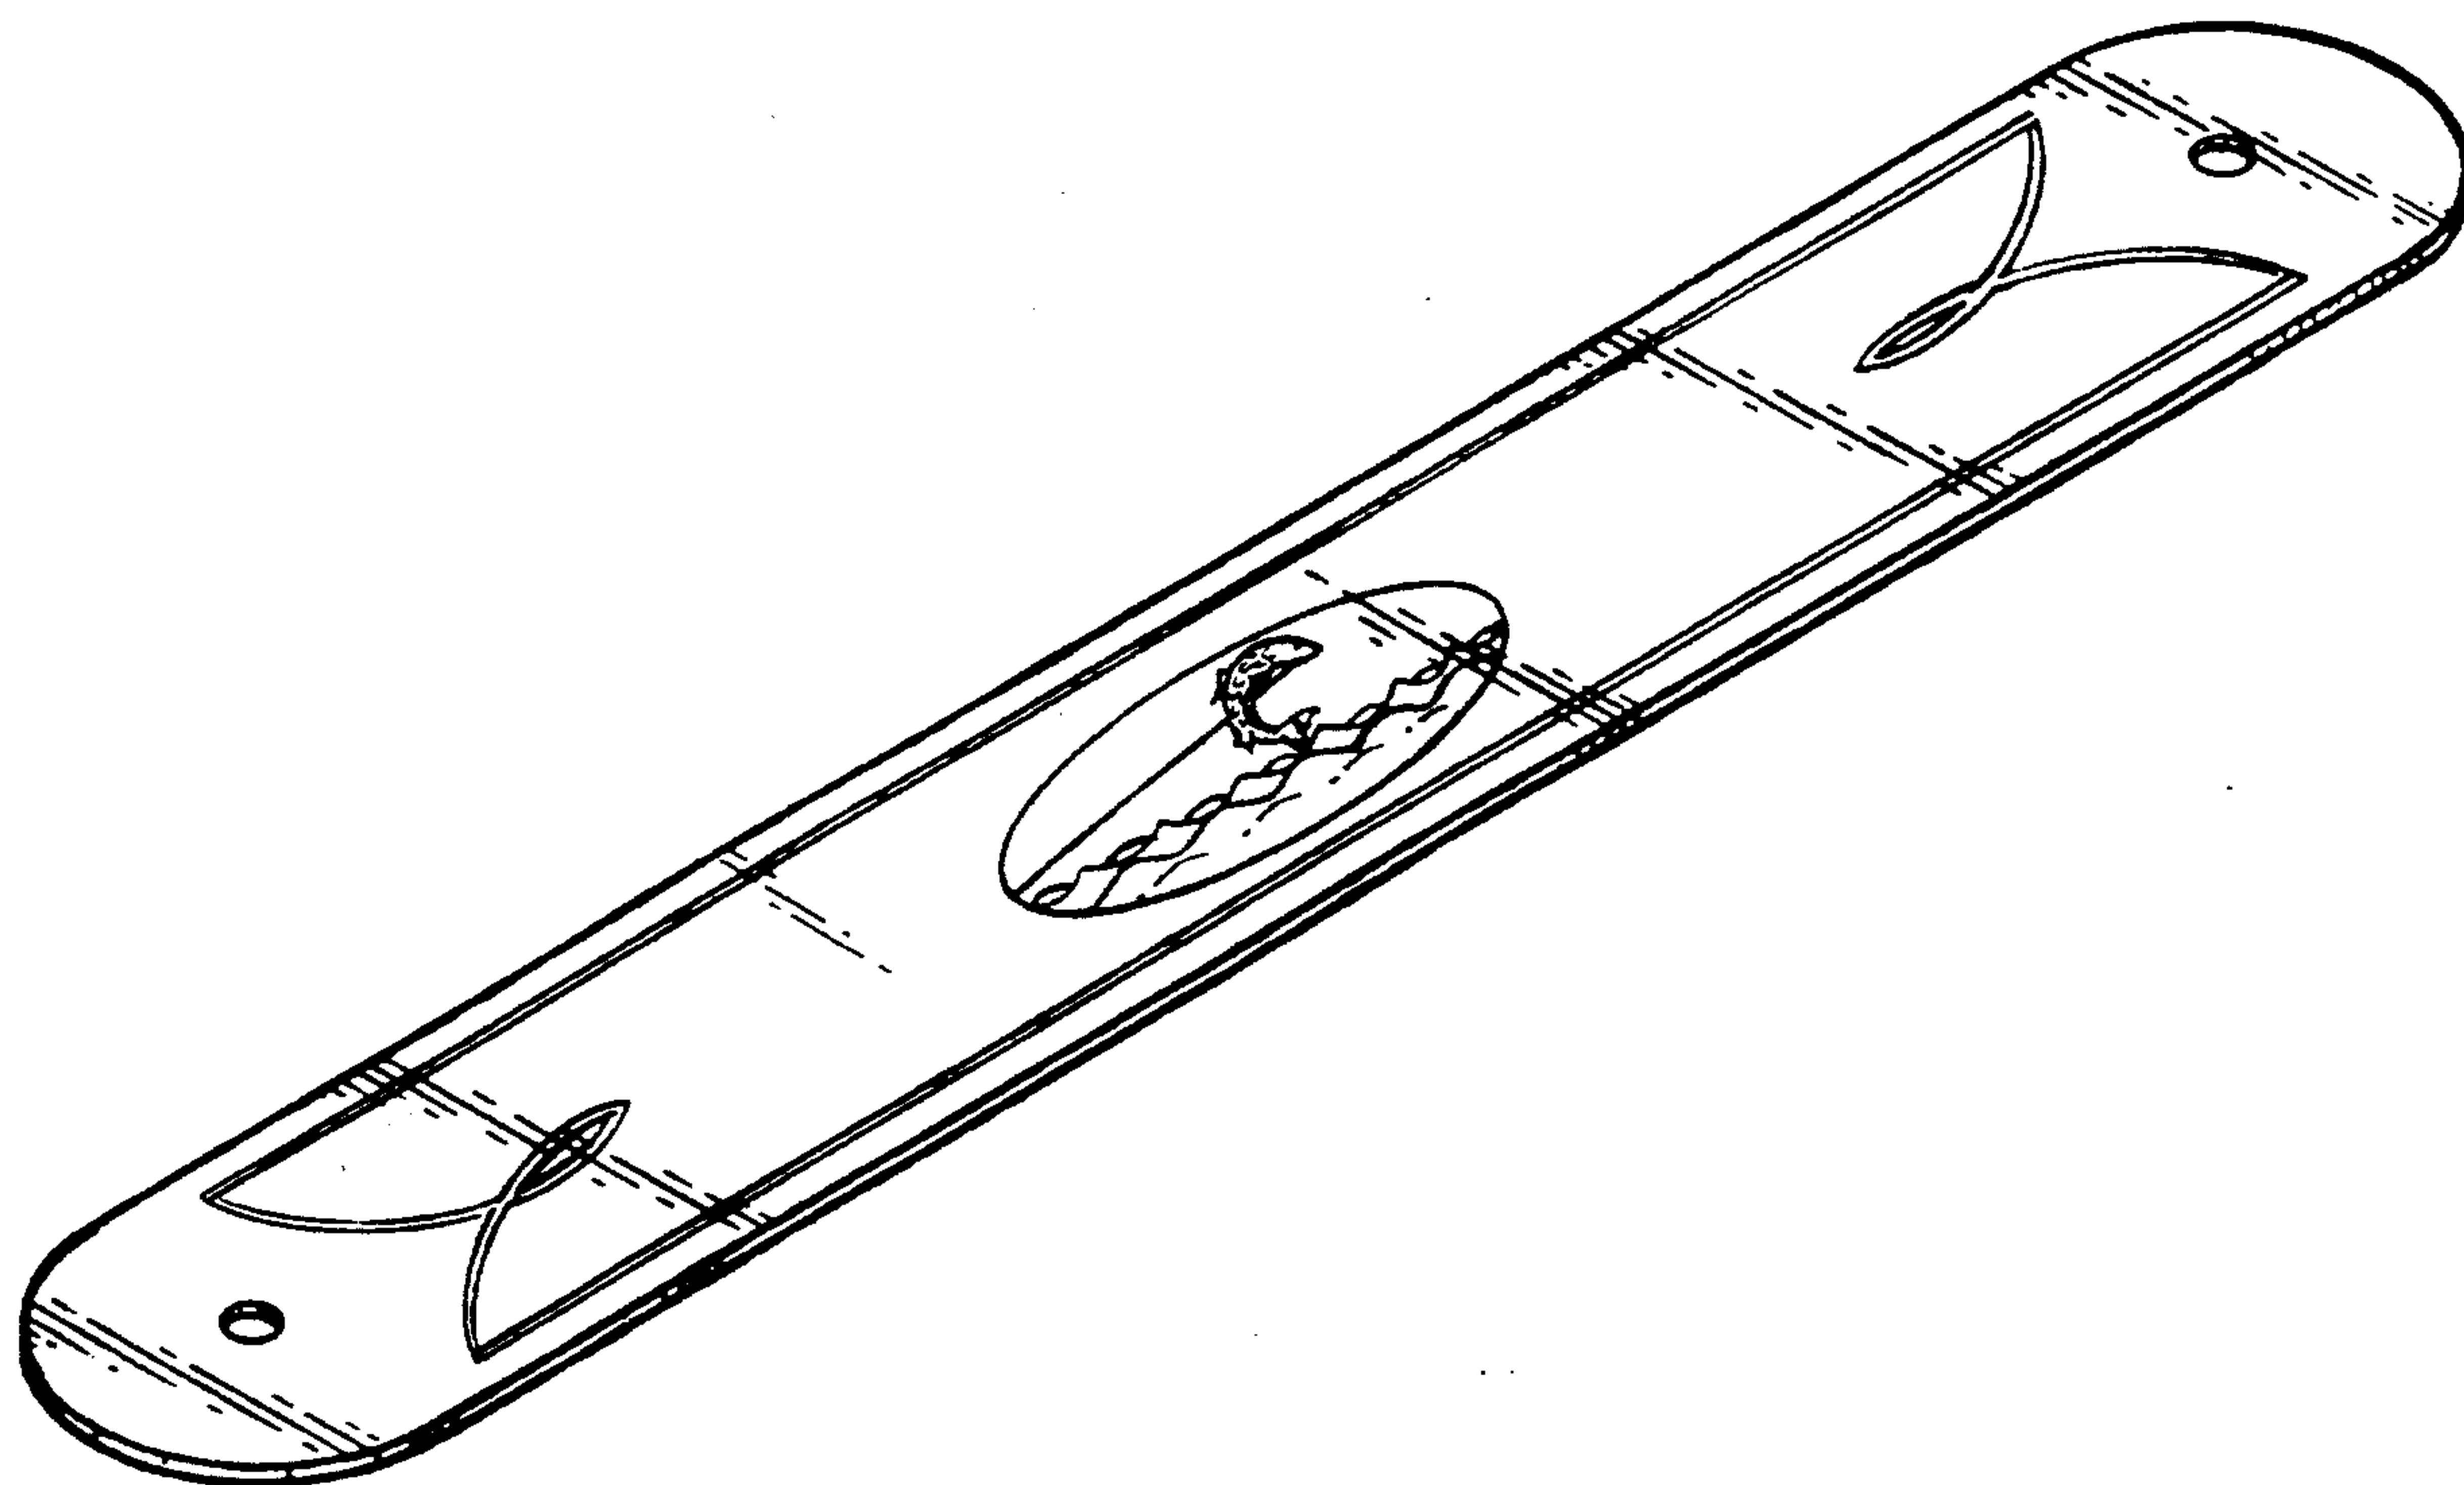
is a perspective view of the adapter plate for mounting headlights on boats embodying the design of the present invention;
